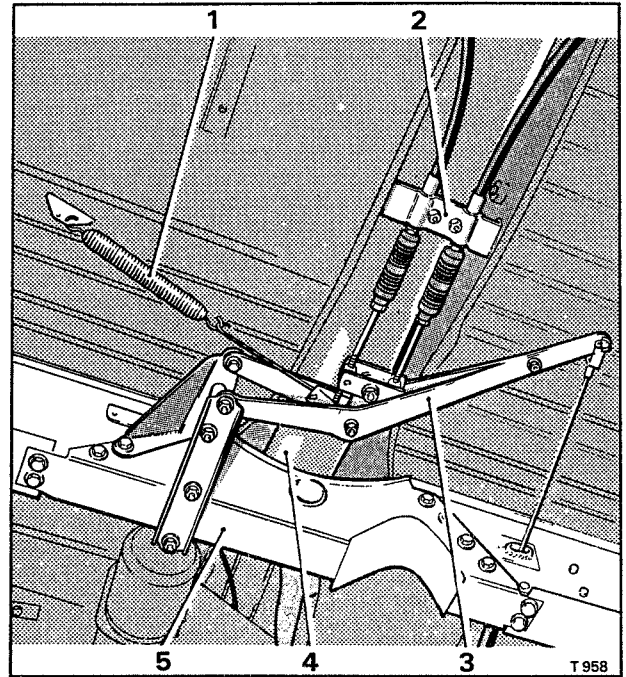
Parking brake intermediate linkage (Right-hand drive cars)
